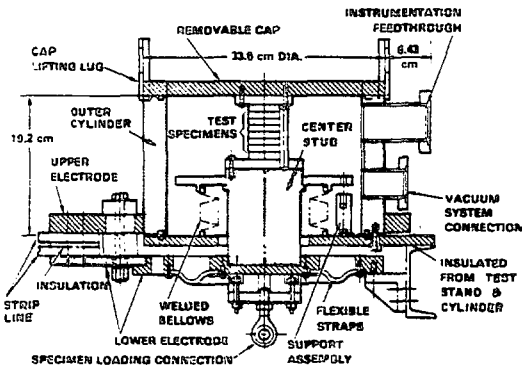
Cross Section of Coaxial Test Fixture Assembly.
